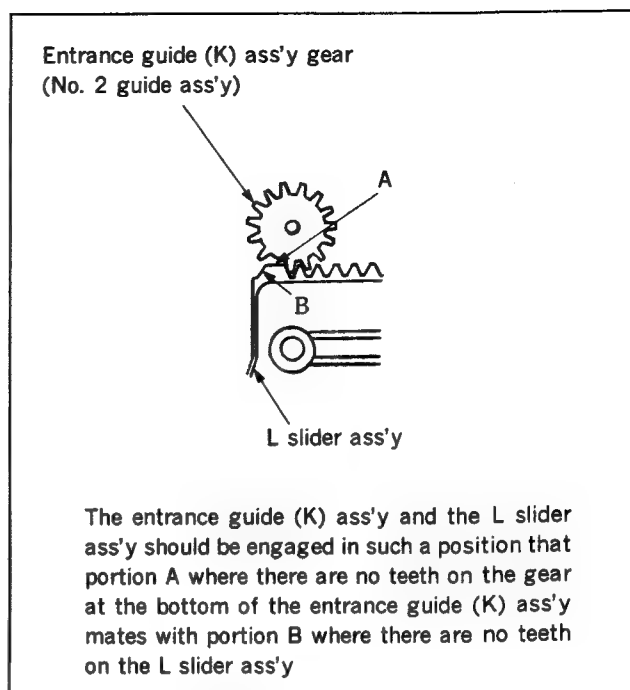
Engaging the entrance guide (K) ass'y gear
